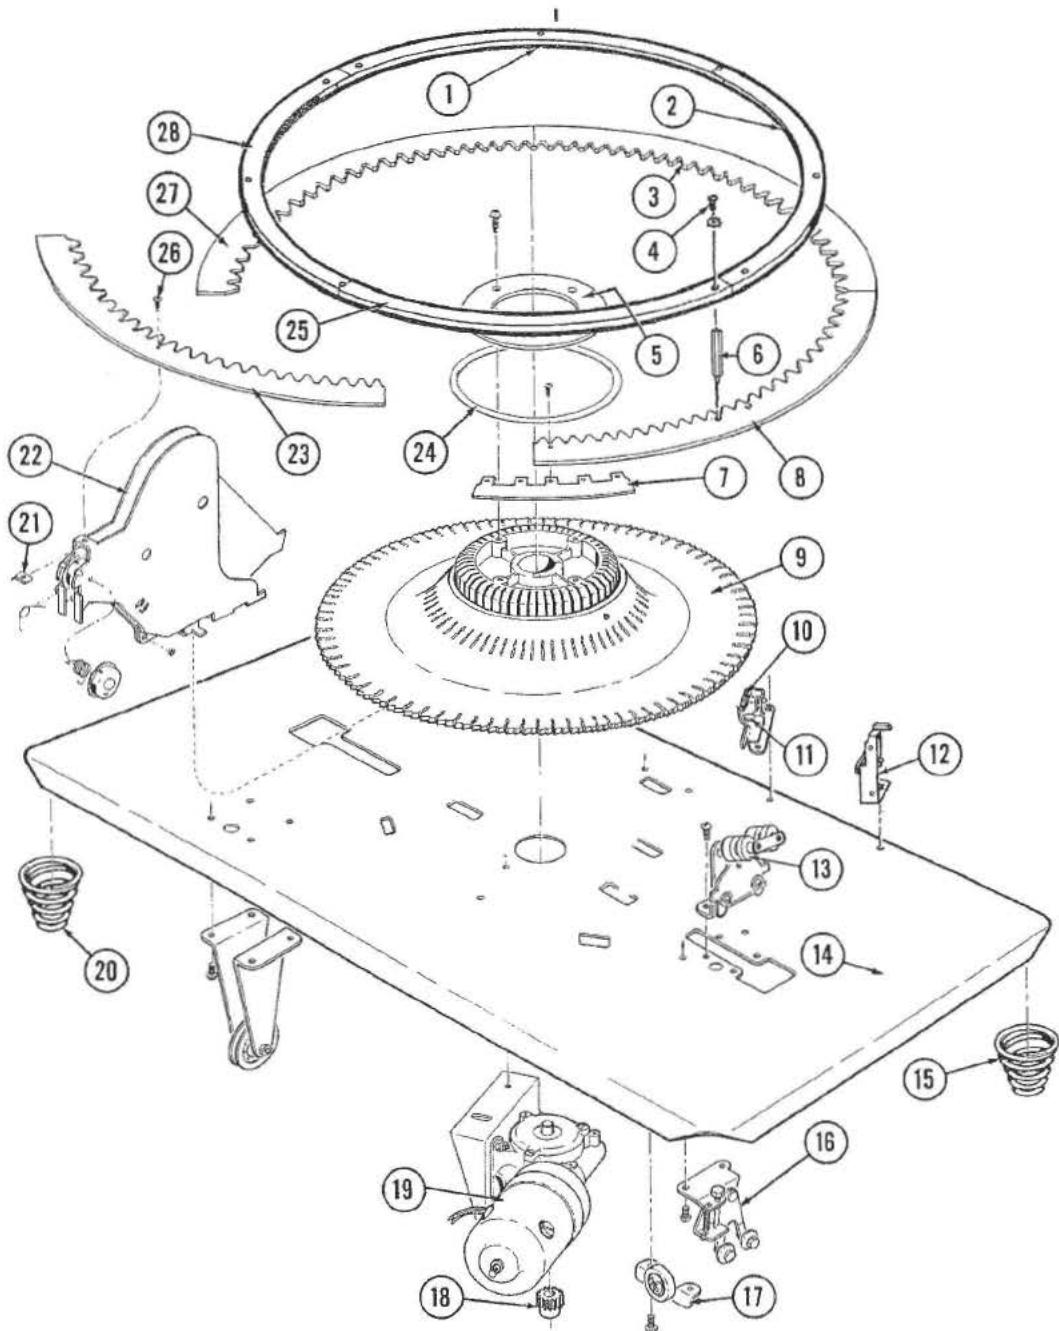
CHASSIS MOUNTING PLATE AND RECORD CARRIER GROUP, 2400-2400S
